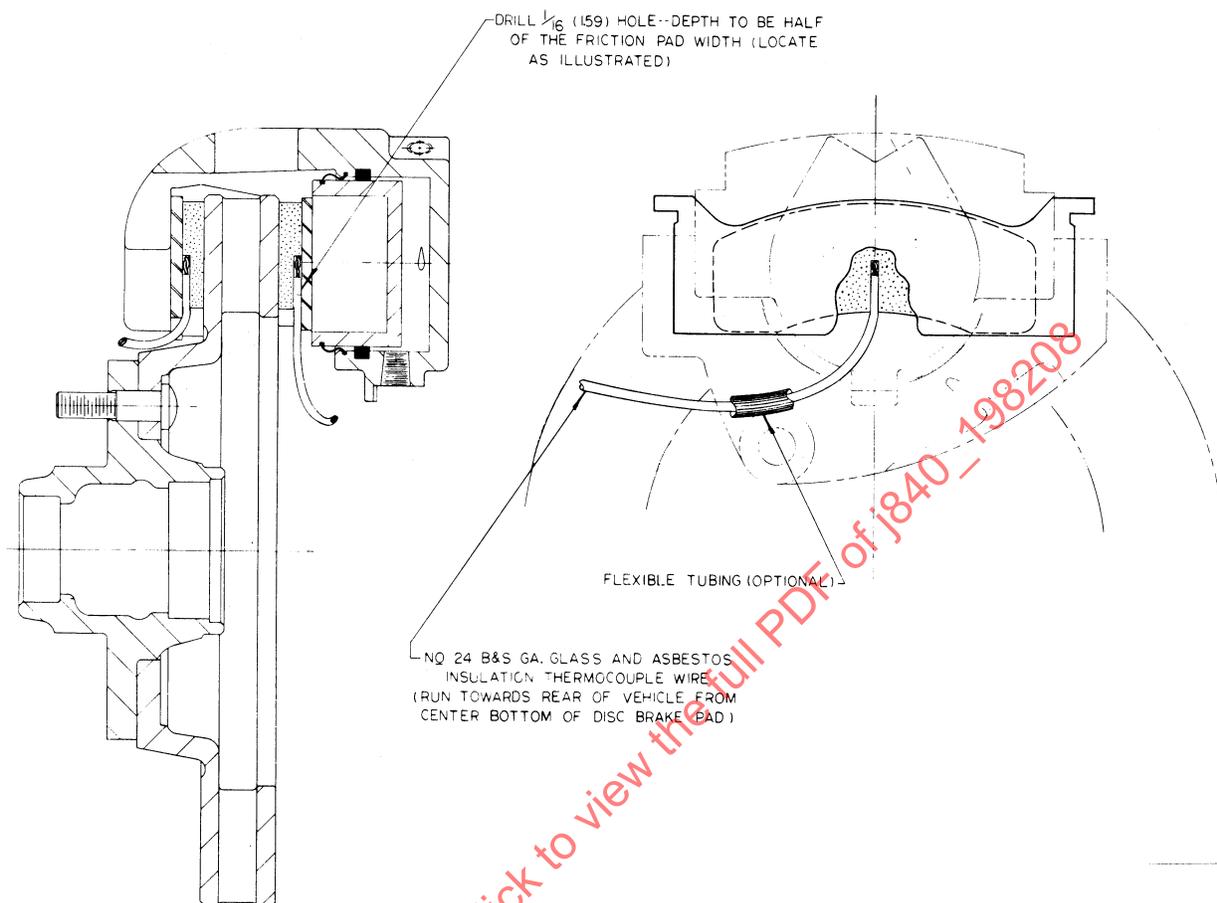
B—DRAWING OF THERMOCOUPLE LOCATION—DISC BRAKE
